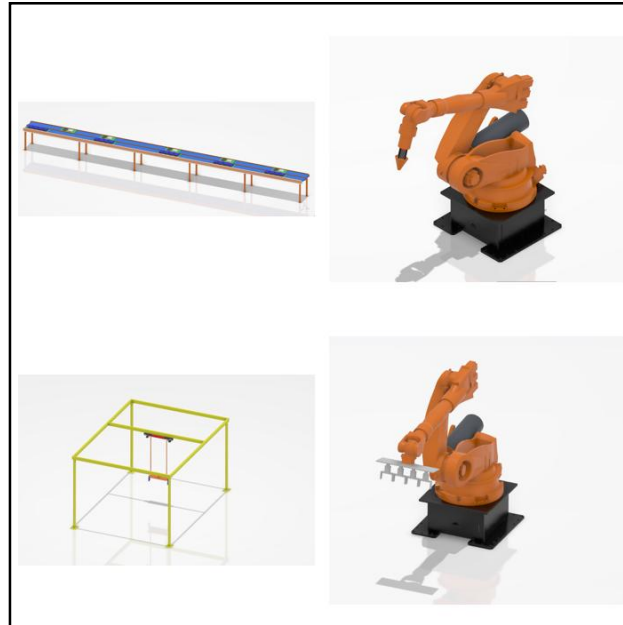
Representative DELMIA virtual-entity concepts: (top-left) cell/module moving conveyor; (top-right) six-axis robotic busbar-welding concept; (bottom-left) KBK overhead crane for module transfer; (bottom-right) cell pre-stacking/stacking/trimming/shaping robot with rake end-effector.
